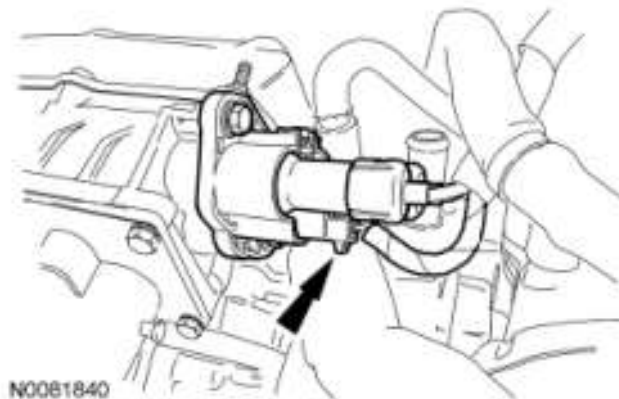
Locating High Voltage Wiring Harness Electrical Connector
